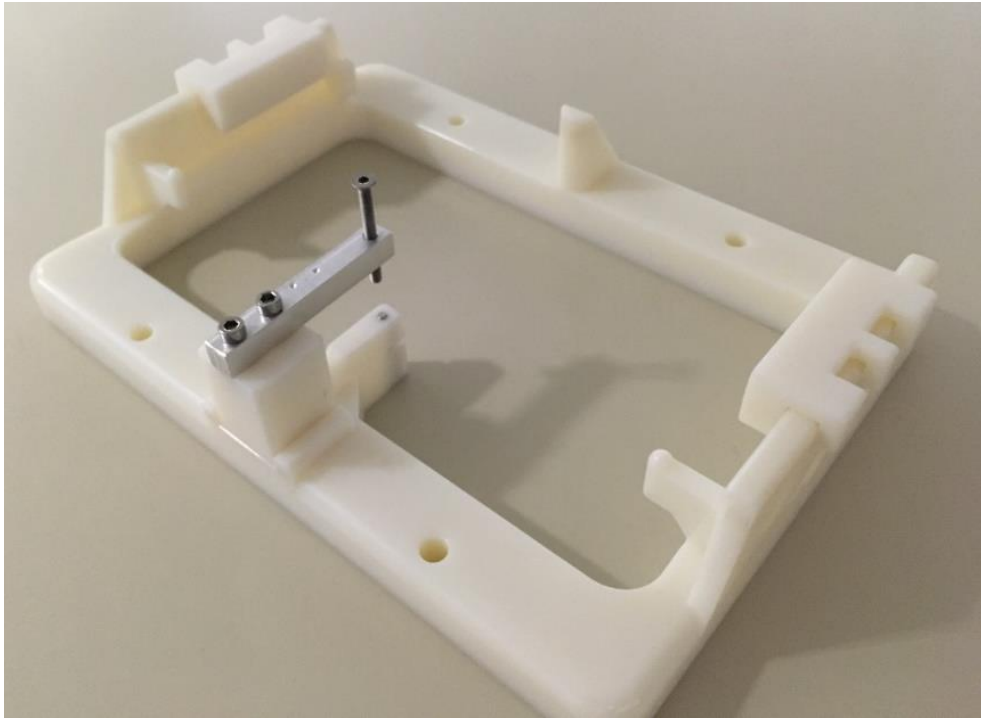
The Jig with an aluminum screw support, guiding and the screws in place
